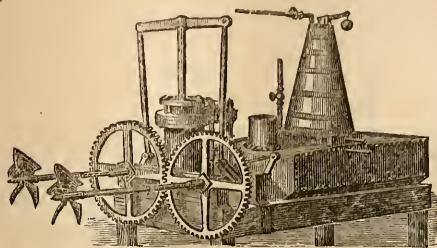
Col. John Stevens's Steam Engine, Boiler, and Screws, 1804.
